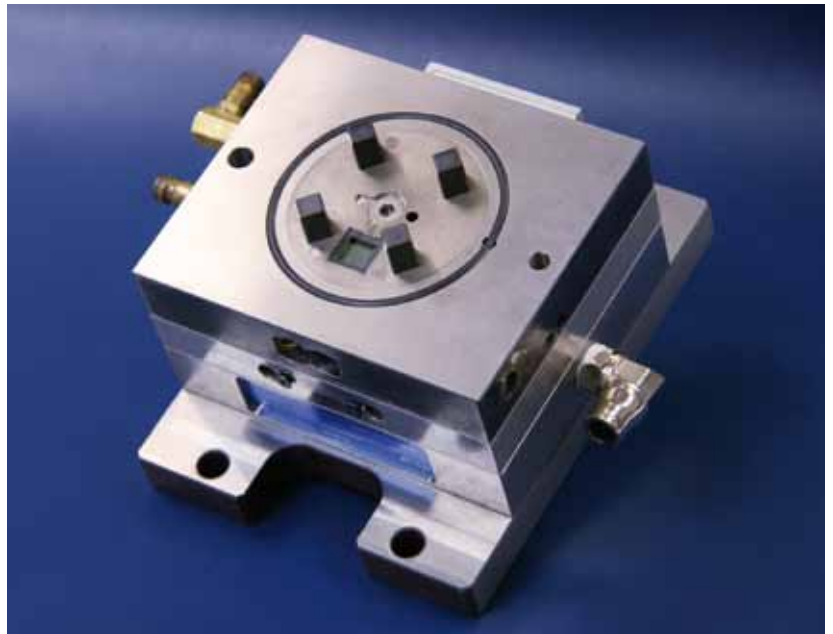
Micro injection moulding tool for the injection moulding machine Microsystem 50 of Battenfeld.
